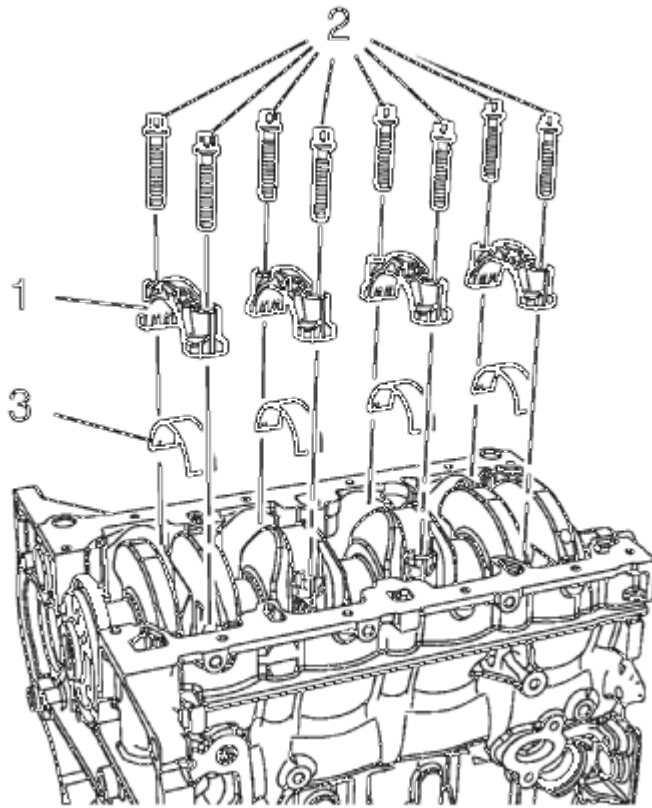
Connecting Rod Bearing, Connecting Rod Bearing Caps And Bolts
